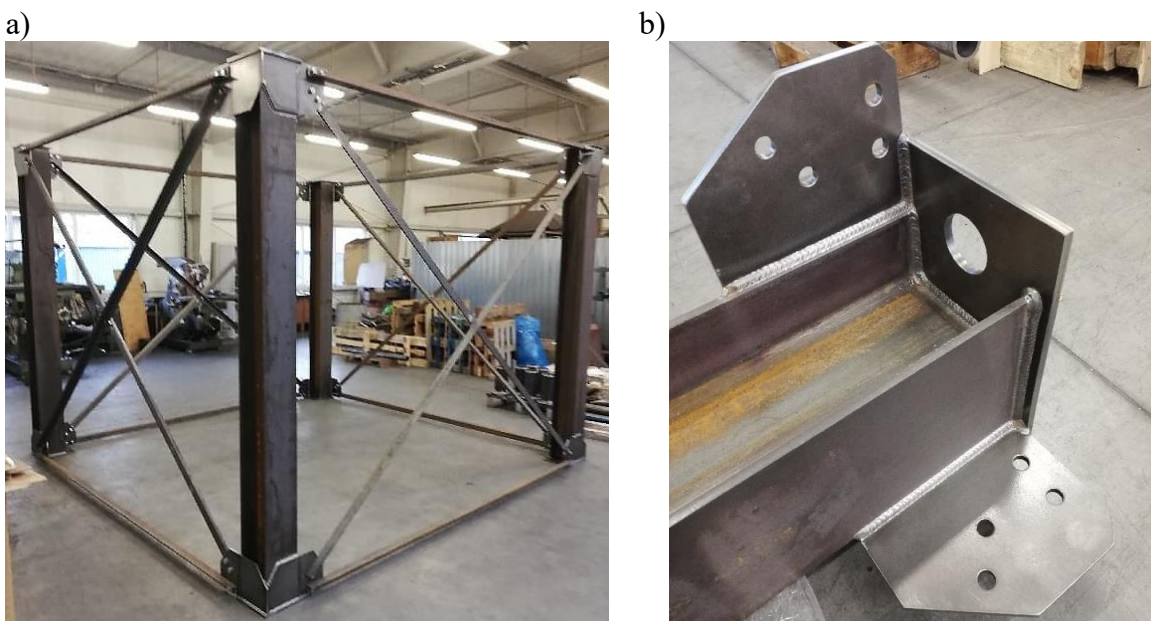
Steel supporting structure after completion: a) illustrative photo, b) construction node detail
